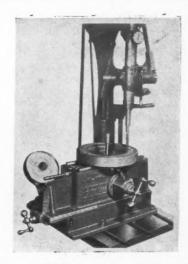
"Hi-Eff" Balancing Machine Built Integral with Drill Press.
